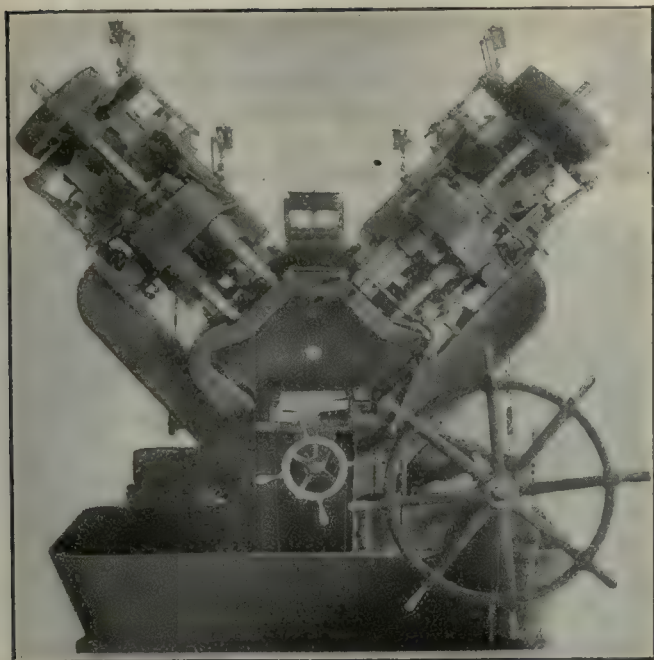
MACHINE WITH TWO INCLINED SPINDLE HEADS
